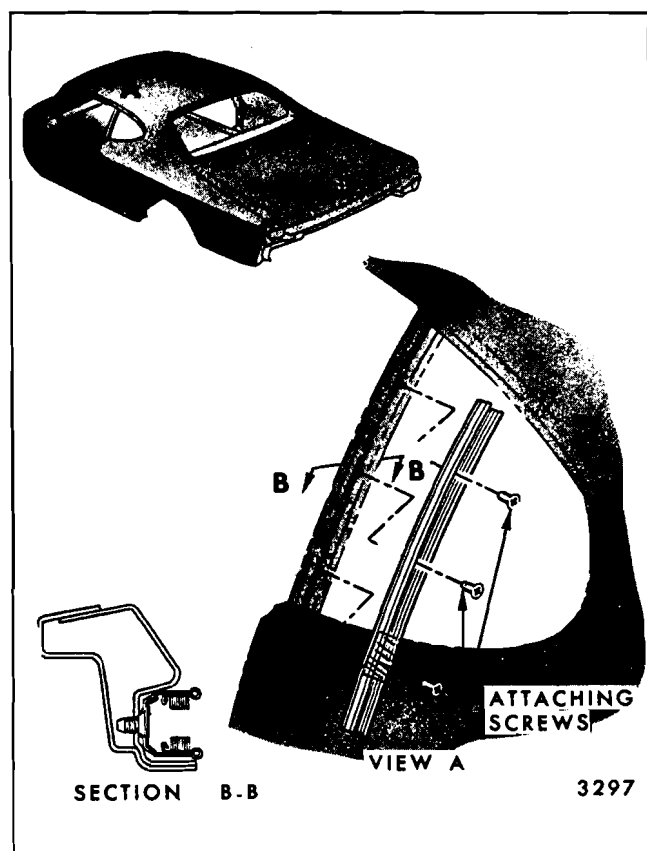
Rear Quarter Window Front Glass Run Channel - Typical of All Closed Styles
